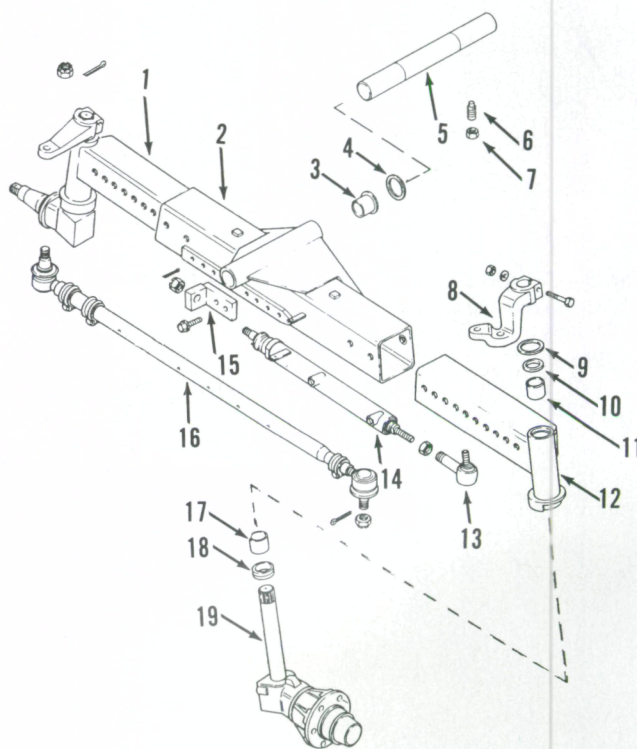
Partially exploded view of front axle assembly used on all two-wheel-drive tractors.
